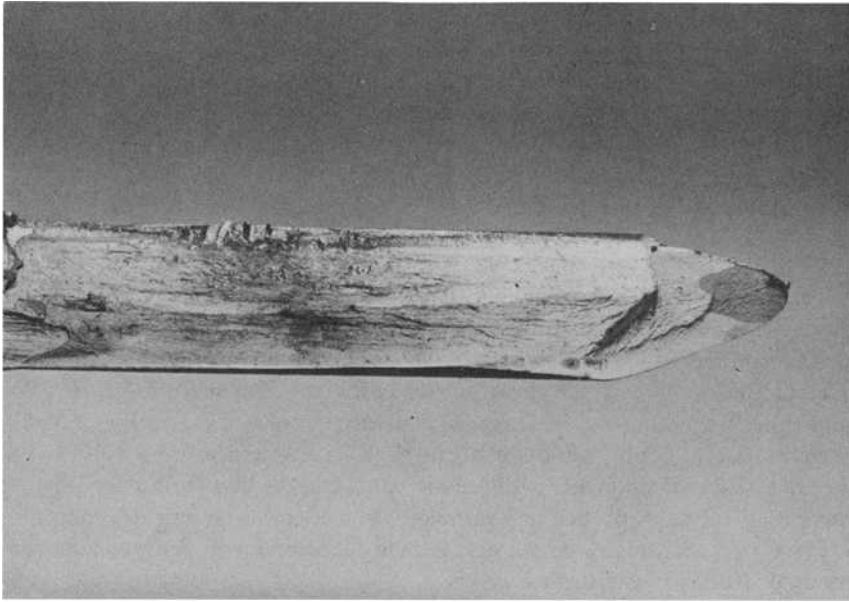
Example of longitudinal shear fracture of induction hardened shaft, fatigue tested in torsion (X0.78).
